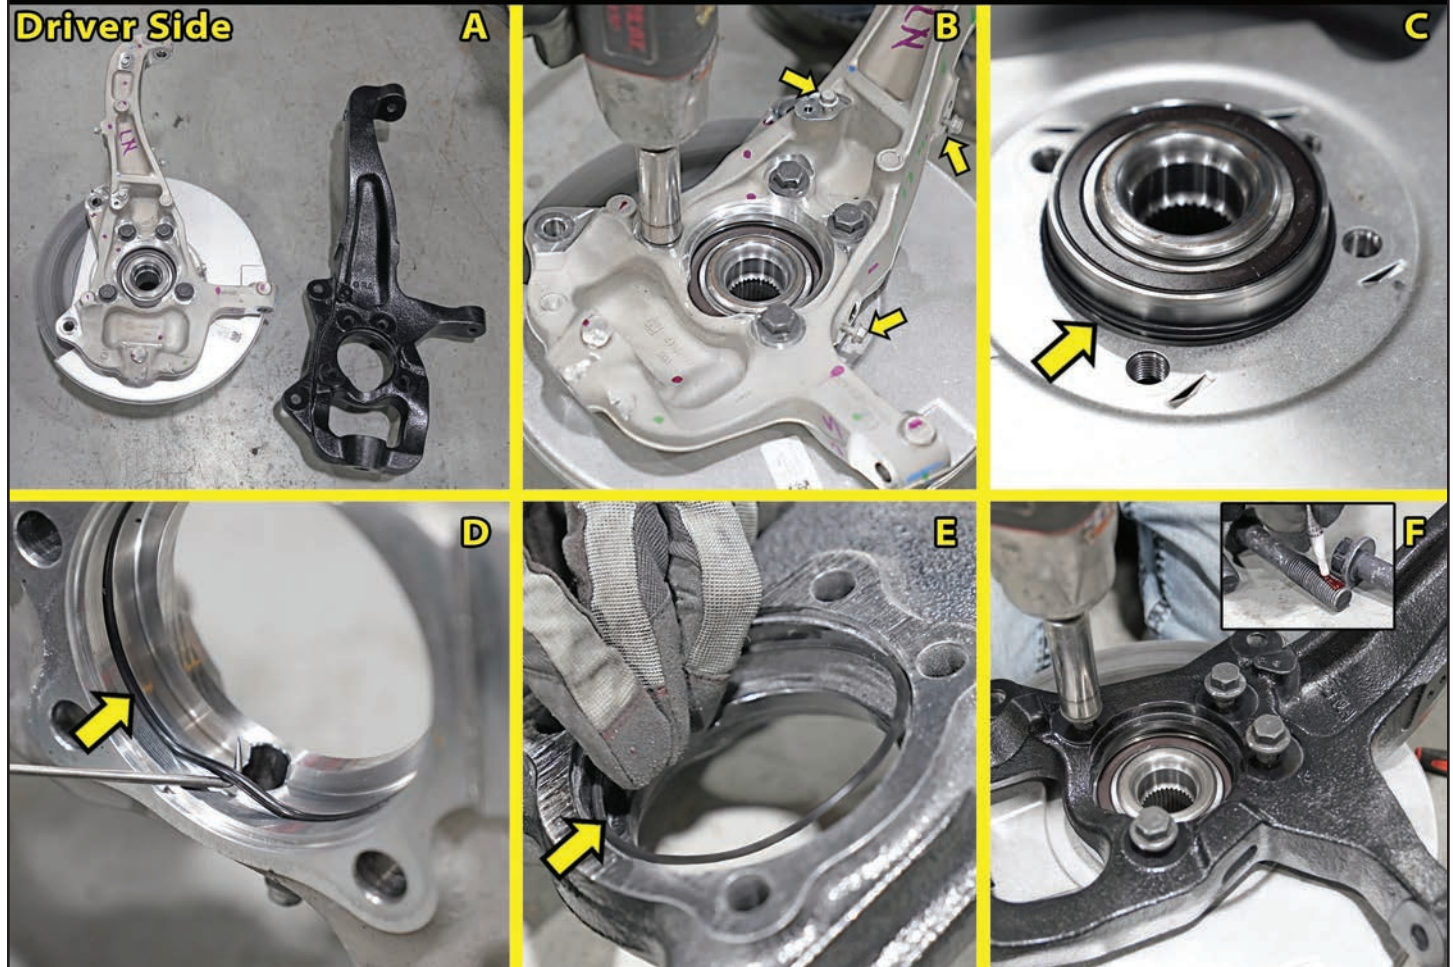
E] Carefully install the O-ring from the factory knuckle into the SUPERLIFT knuckle.
